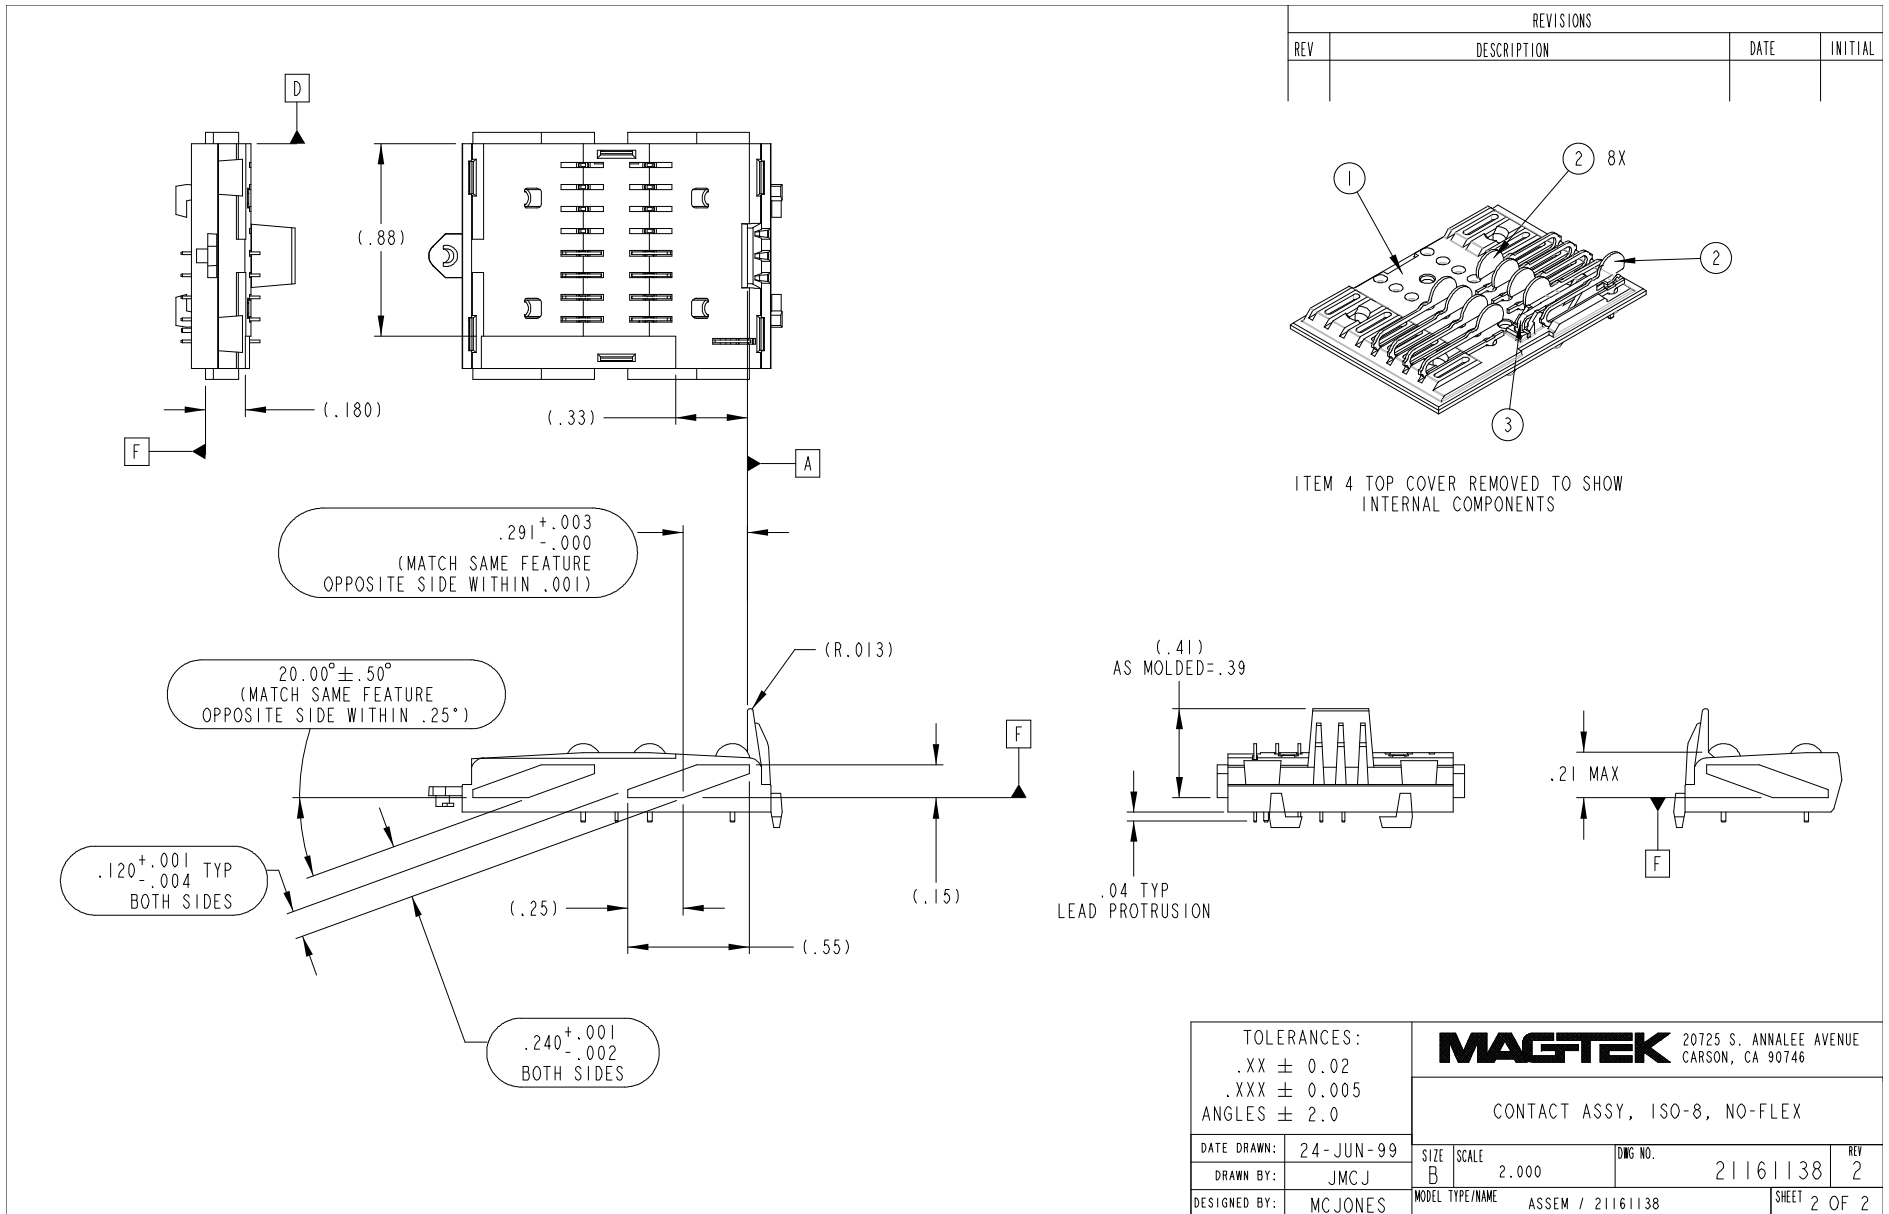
Contact Assembly, ISO-8, No Flex Sheet 2
